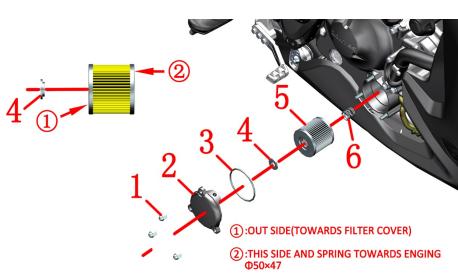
CO	OOLING SYSTEM ONENT	Change engine oil filter	CHK ADJ	e
